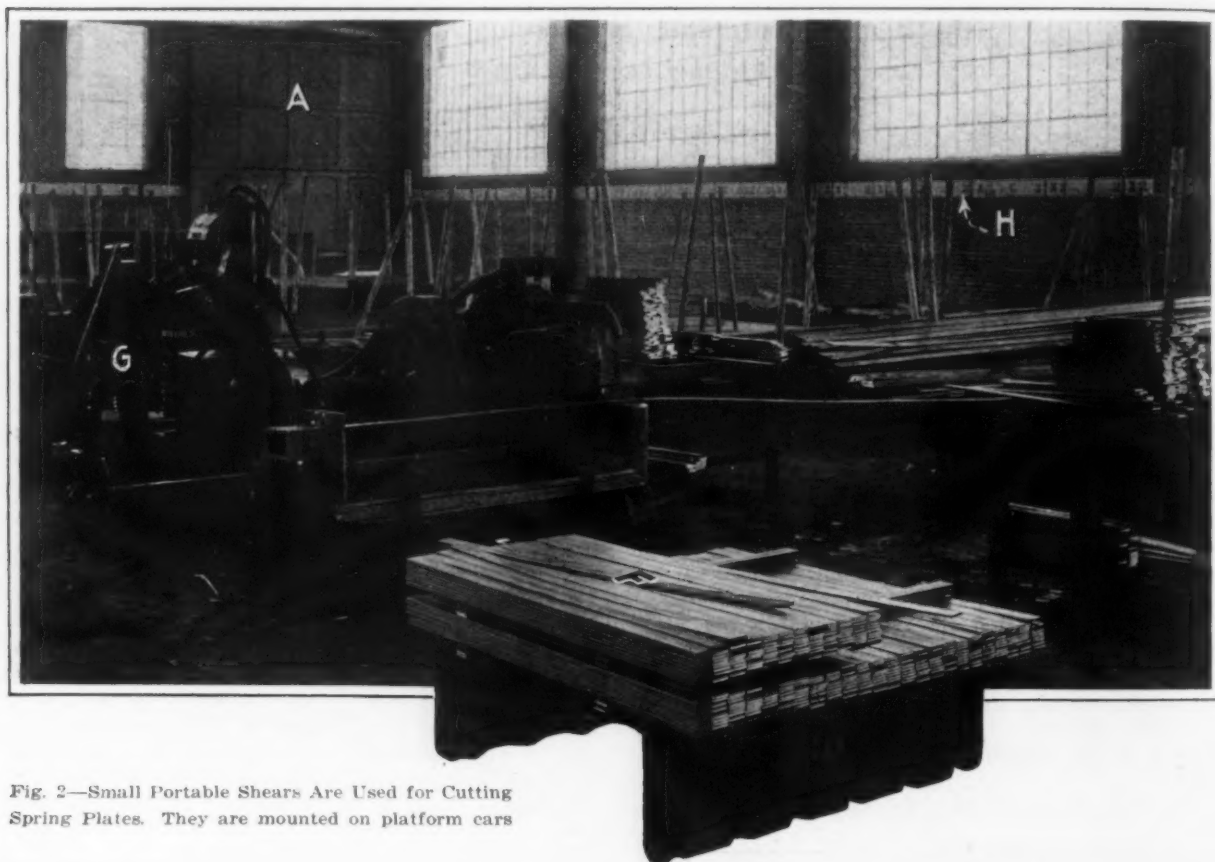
Small Portable Shears Are Used for Cutting Spring Plates. They are mounted on platform cars
